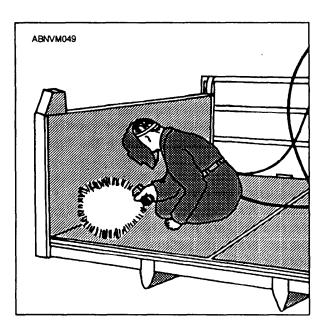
CMA welding aluminum truck bed.
